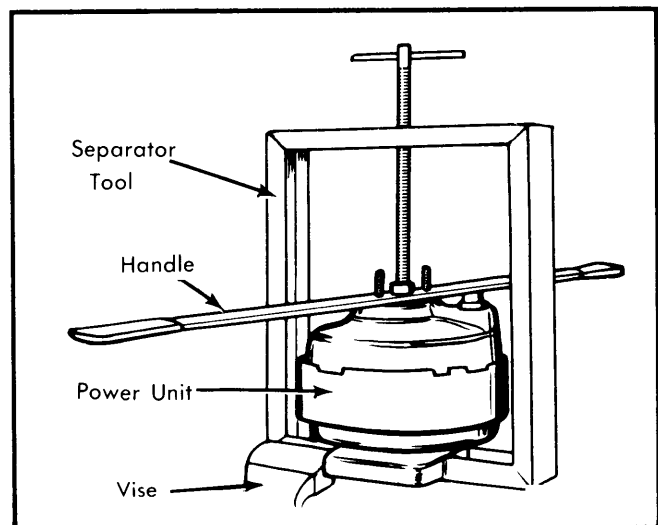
Separating Front and Rear Housings Showing Separator Tool and Spanner Handle
